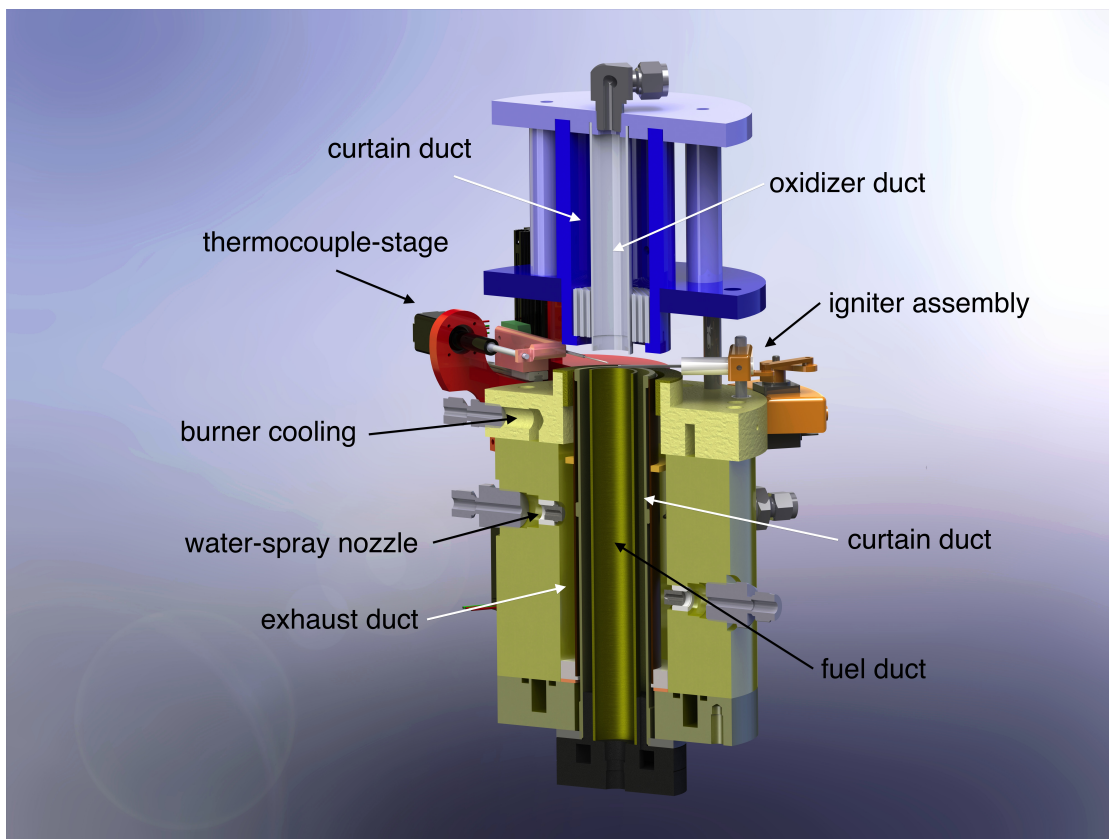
CAD rendering of the entire burner assembly showing the fuel (lower) and oxidizer (upper) sections
